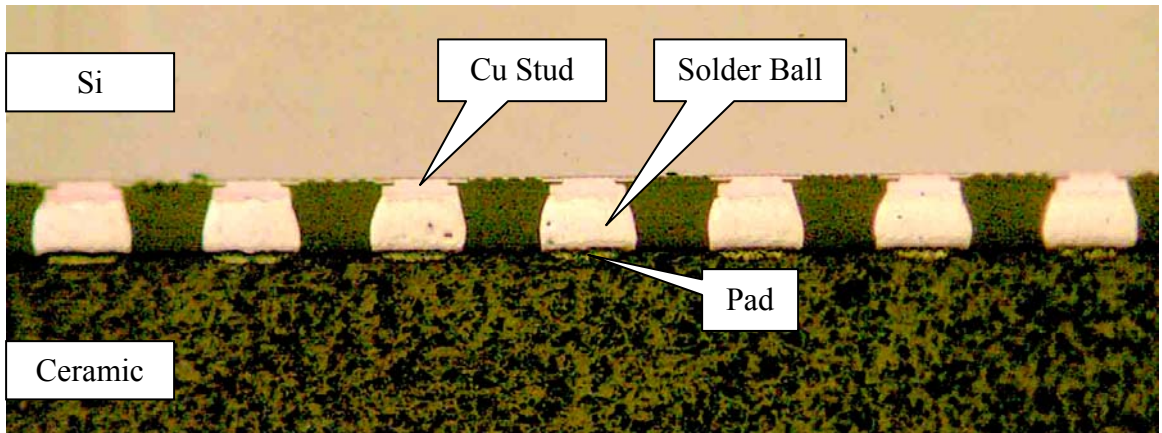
Cross-sectioning picture, showing good solder joint formation
